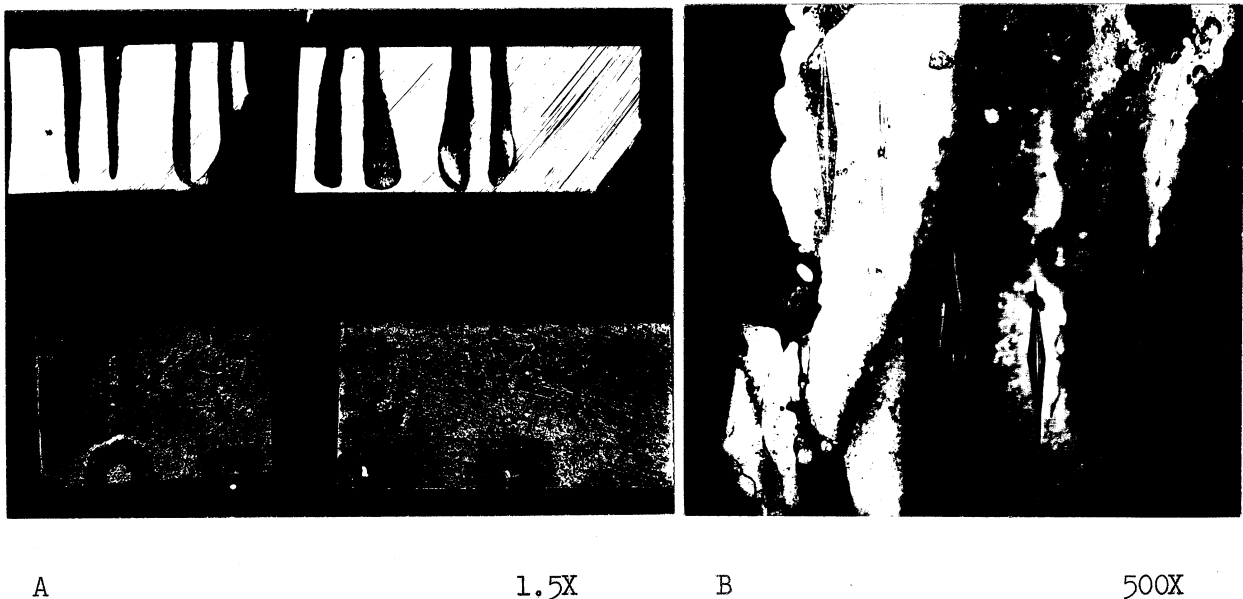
Cross Section of Electrosparked Holes and Electrode Build-Up When Drilling Carbon Tool Steel with a Molybdenum Electrode. Figure 16A shows a cross section and top view of four holes drilled with a head vibration of 180 cycles per second and the following R-C values, starting from the left: 10 ohms and 200 microfarads, 10 ohms and 100 microfarads, 20 ohms and 50 microfarads, 100 ohms and 20 microfarads. Figure 16B shows the polished and etched build-up with the Knoop indentations in it.
